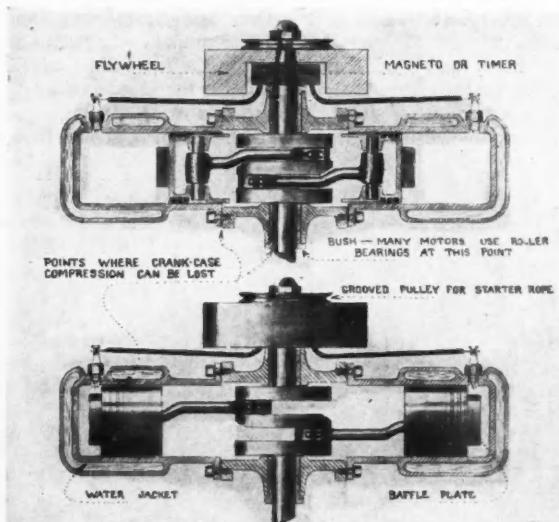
Section of a typical twin outboard engine showing how compactly it can be built
